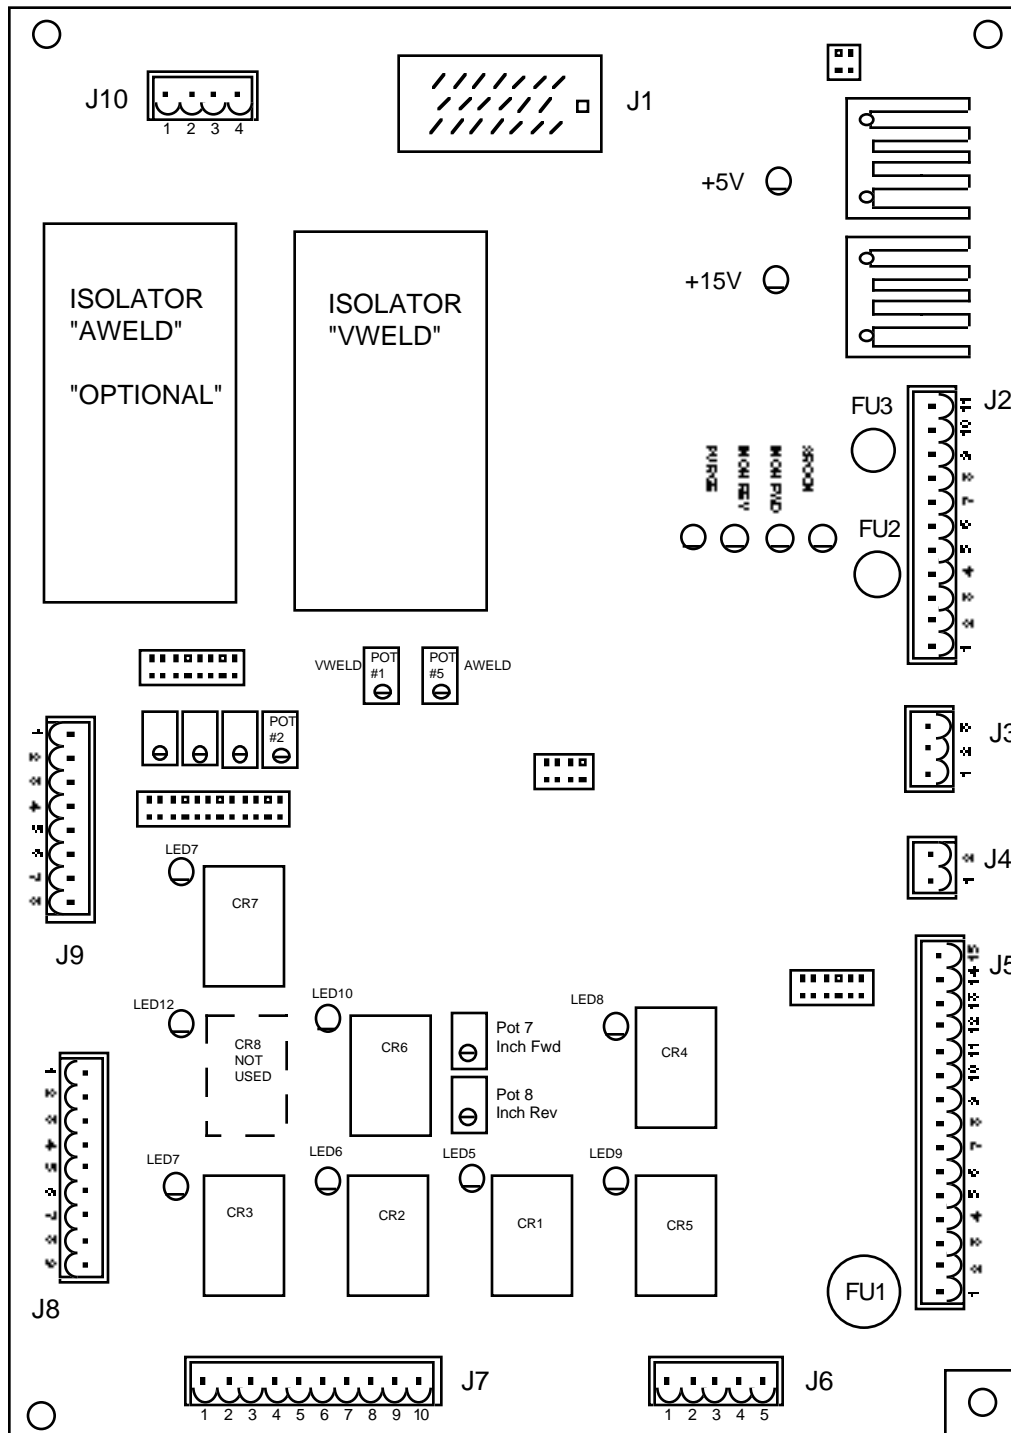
Plug and Socket Locations on the UWI PC Board
